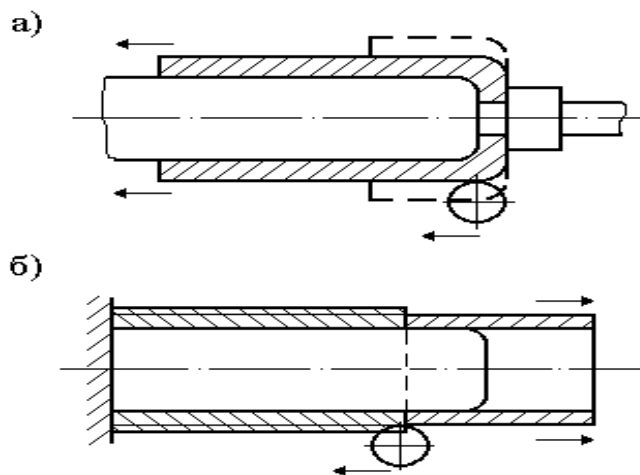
Rotary drawing of a cylindrical thin-walled part by direct (a) and reverse (b) methods
